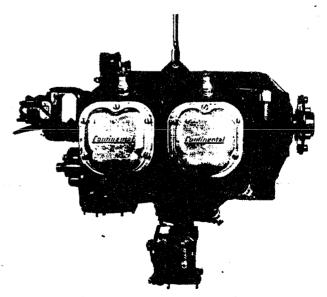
Hoisting Engine with Crankcase Lifting Eye.
